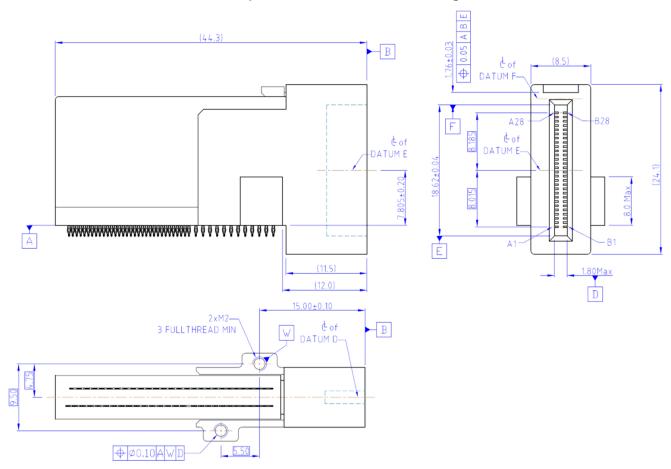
1C RIGHT ANGLE ORTHOGONAL CONNECTOR DIMENSIONS (MM)
